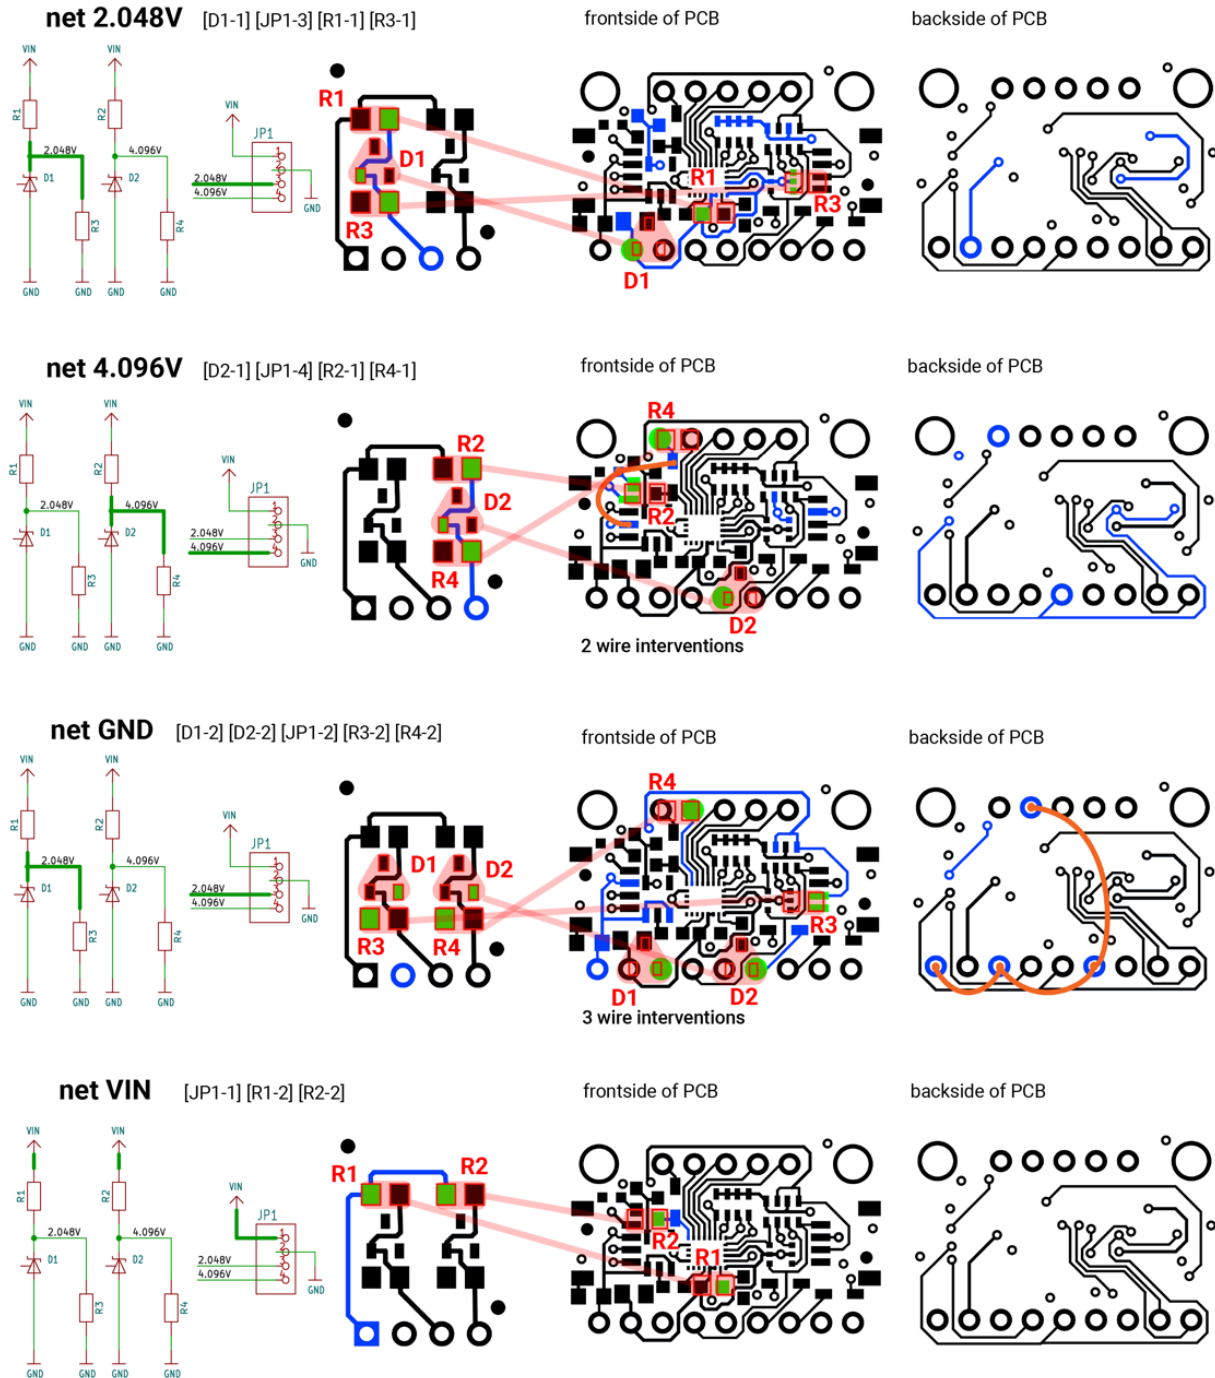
We illustrate the example of matching the LM4040 breakout board onto the LSM9DS1 breakout board. To implement the circuit on the board, ProtoPCB identified a combination of using existing traces, adding wires, and cutting traces that are needed. We highlight the interventions needed along each net.
